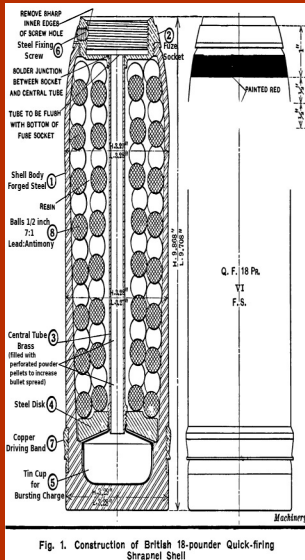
Construction of British 18-pounder Quick-firing Shrapnel Shell
